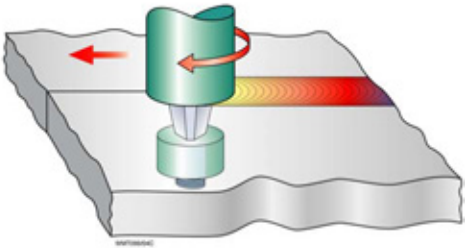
Self-reacting bobbin stir welding, showing near and far side shoulders, courtesy of TWI
